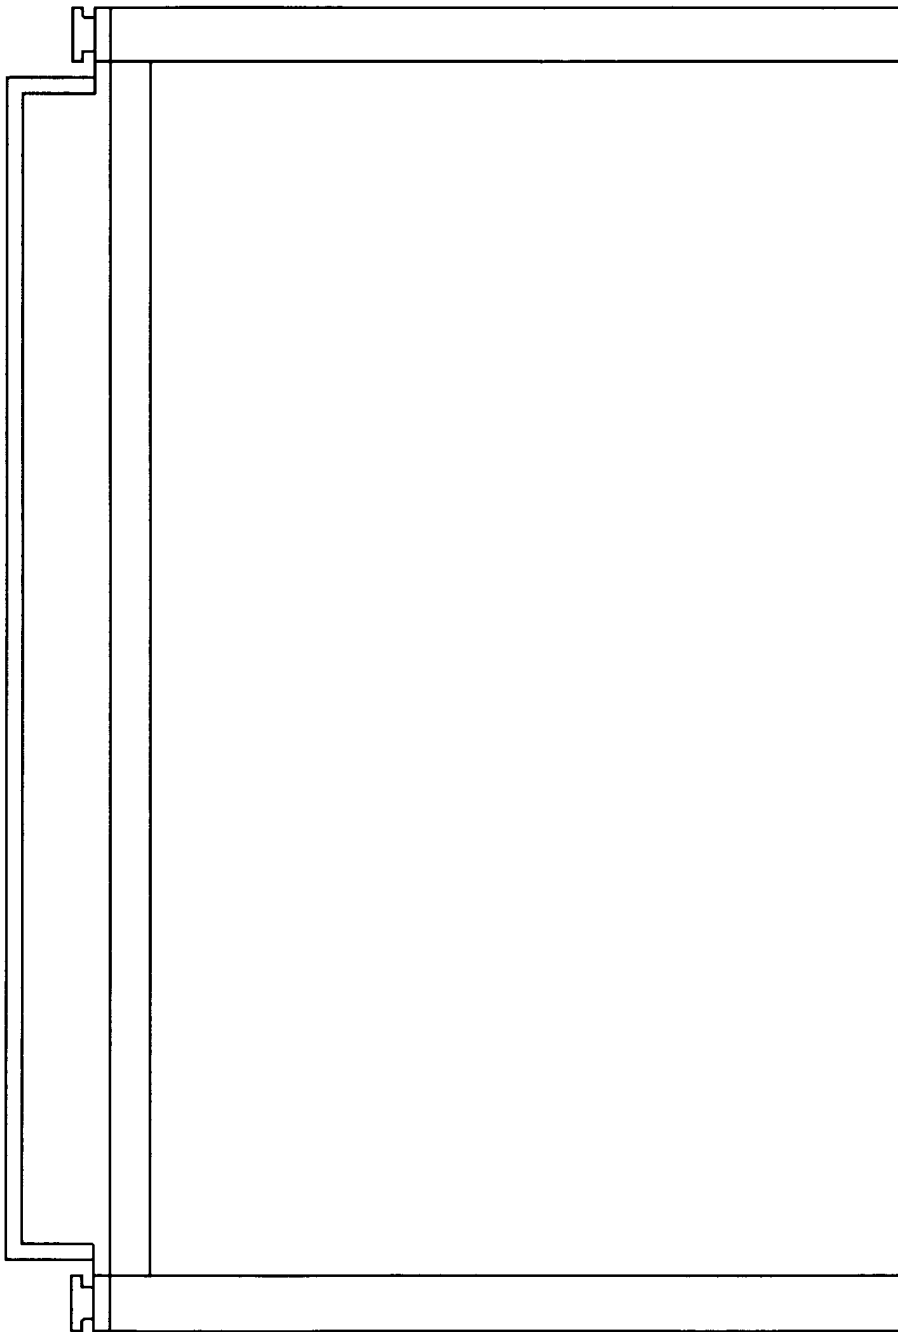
A: Top view of the left end of a ceiling frame (40 foot collapsible cargo container)
